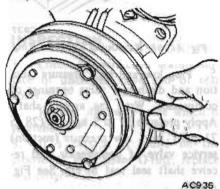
Checking Clutch Hubto-Pulley Clearance
